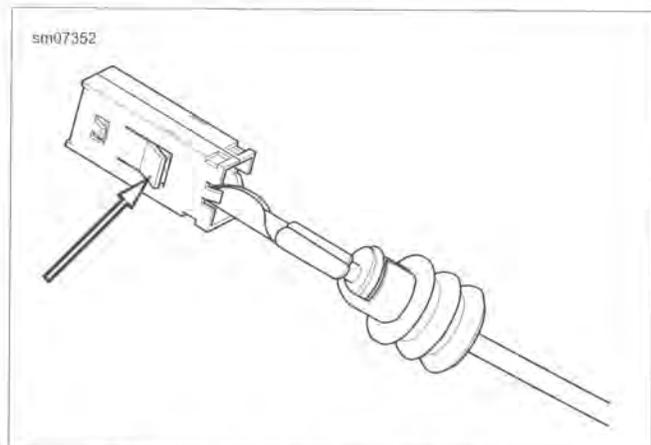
Tangs: Bosch Compact 1.1M Socket Terminal
